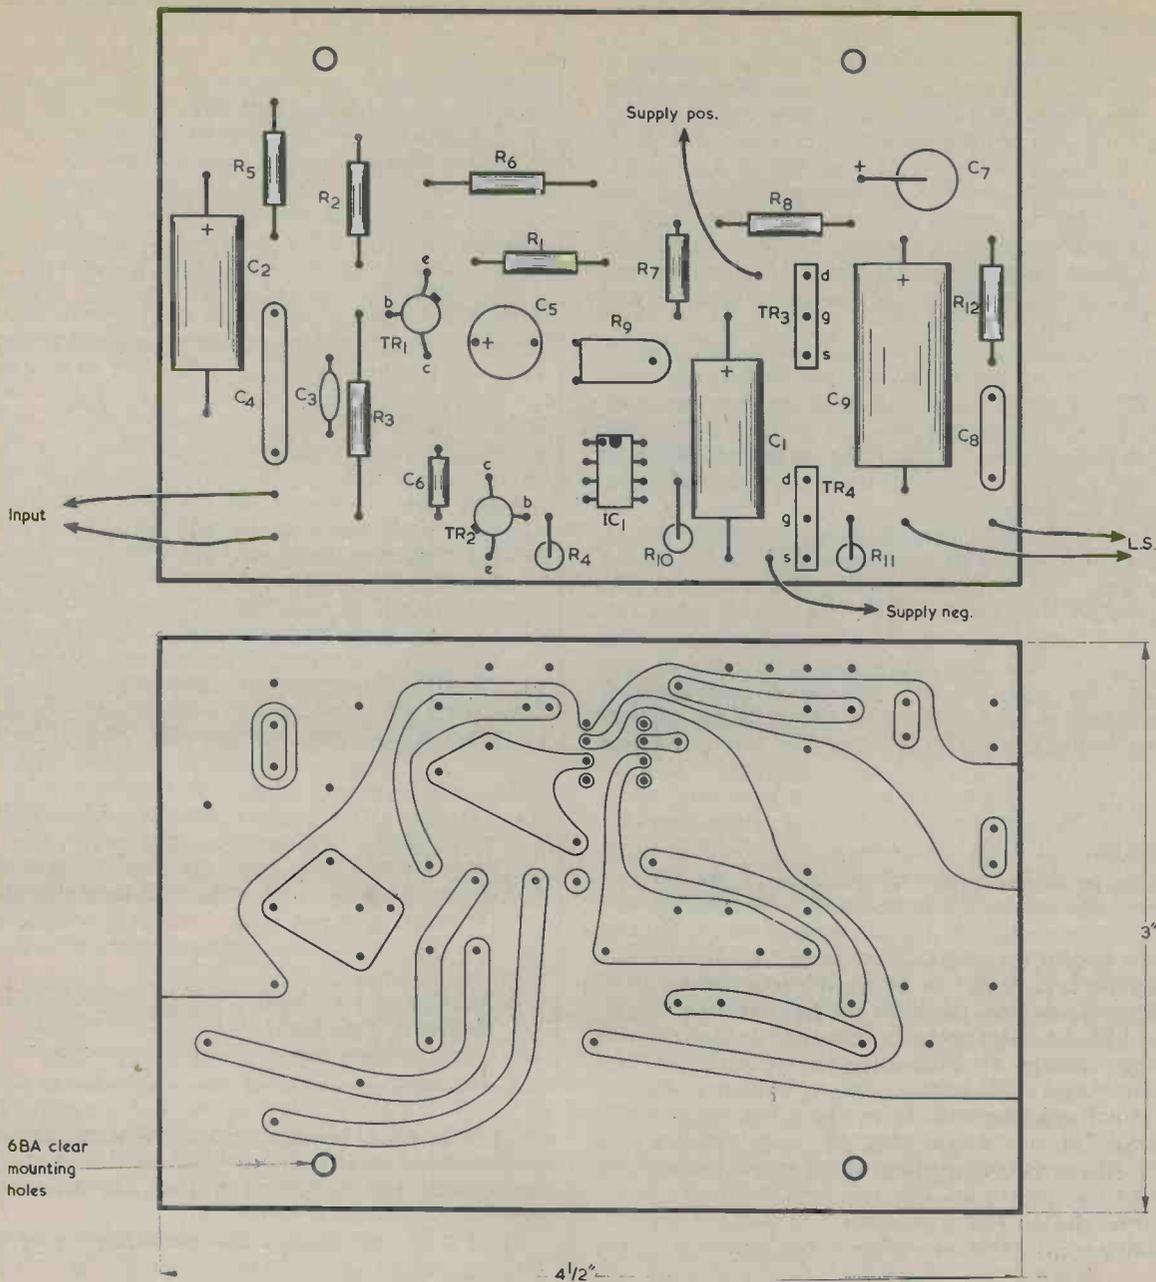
Component and copper sides of the printed circuit board. This is reproduced fullsize
